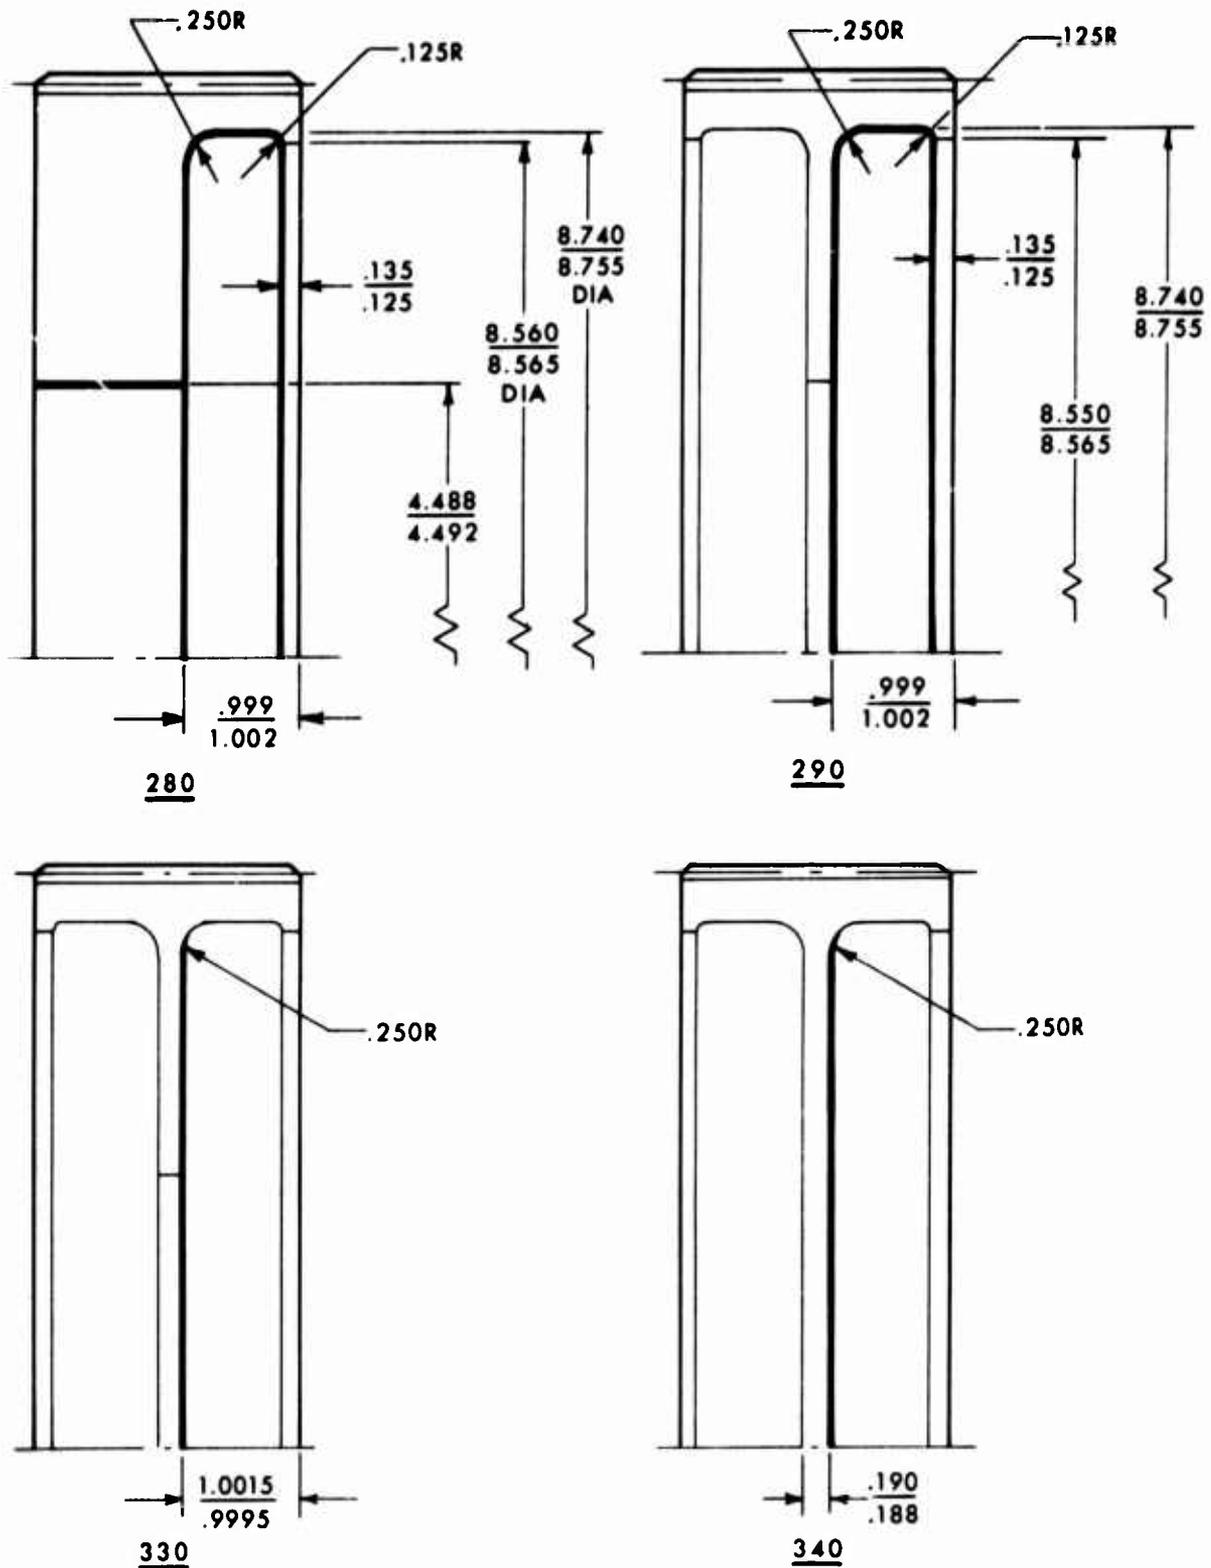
, RG351-11278-103: Machine Operation Drawing (Sheet 2 of 2).
